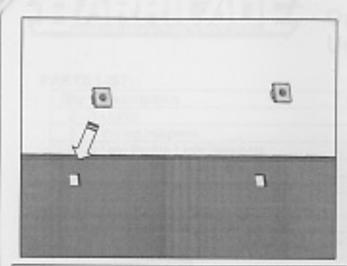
On models without received hitch, reuse triple bolt plate to attach bumper to ends of frame
